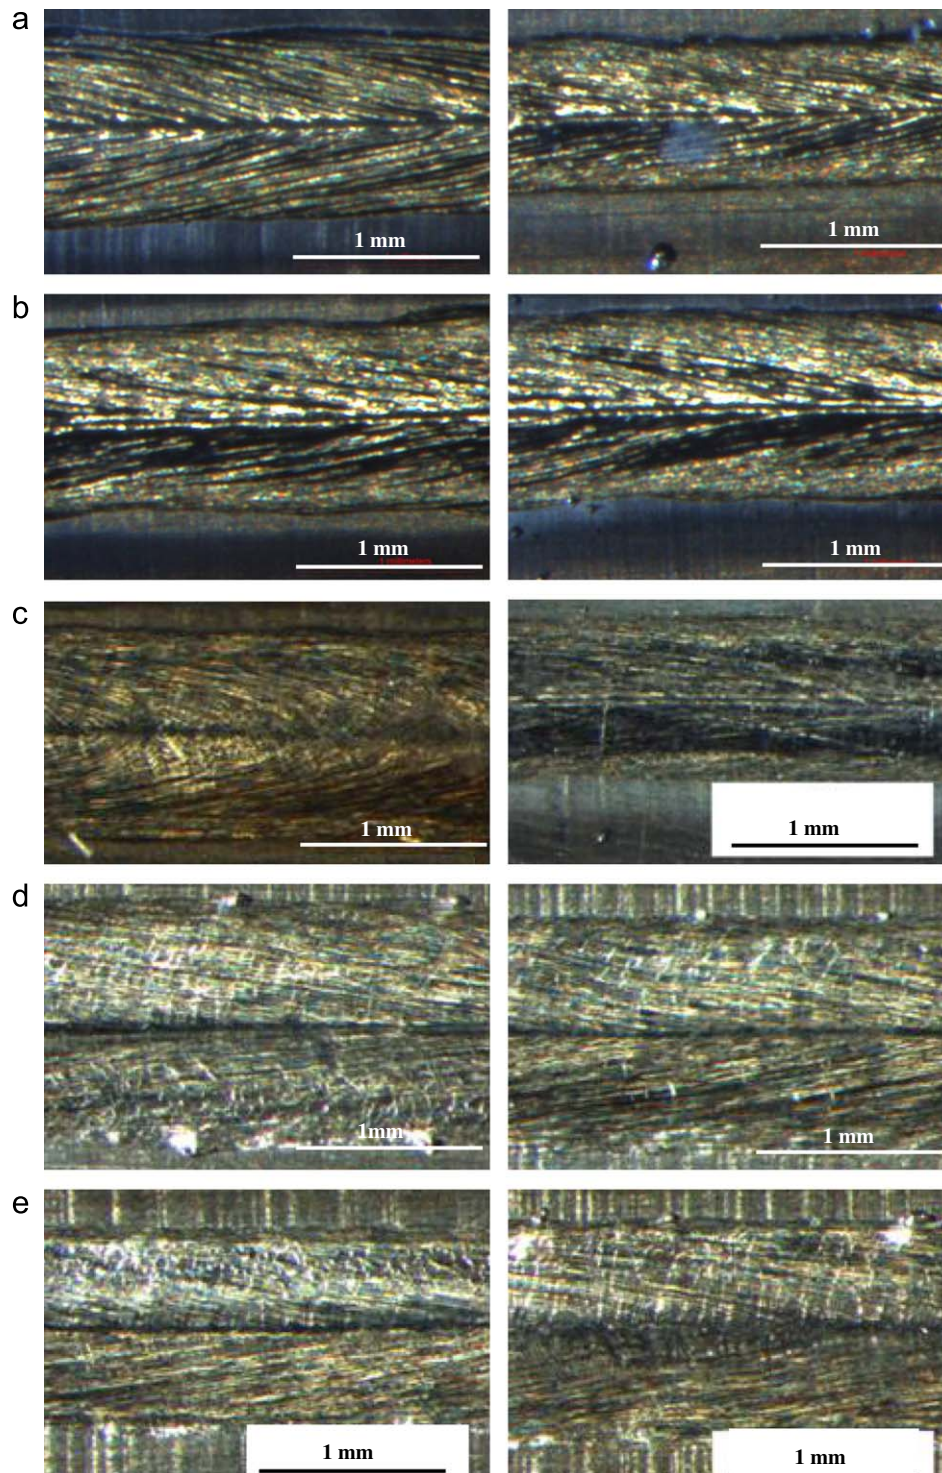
Stereoscopic micrographs indicating typical surface morphologies of 1 mm sheets at welding speeds (a) 4.5, (b) 6.0, (c) 7.5, (d) 9.0 and (e) 10.5 m/min, respectively. The left column is the top surface. The right column is the root surface for (a–c) but the second-sided welding surface for (d–e) (the welding direction is from the right to the left).
